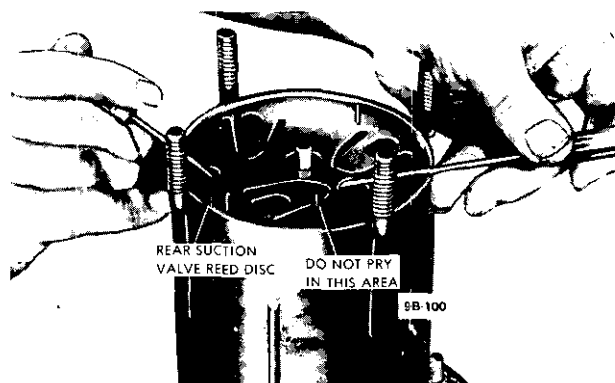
B-100 Removing Rear Suction Valve Reed Disc
